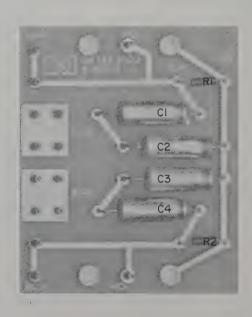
A5 Bias Filter Assembly Component Identification Serial Numbers Prefixed 906- and Above
